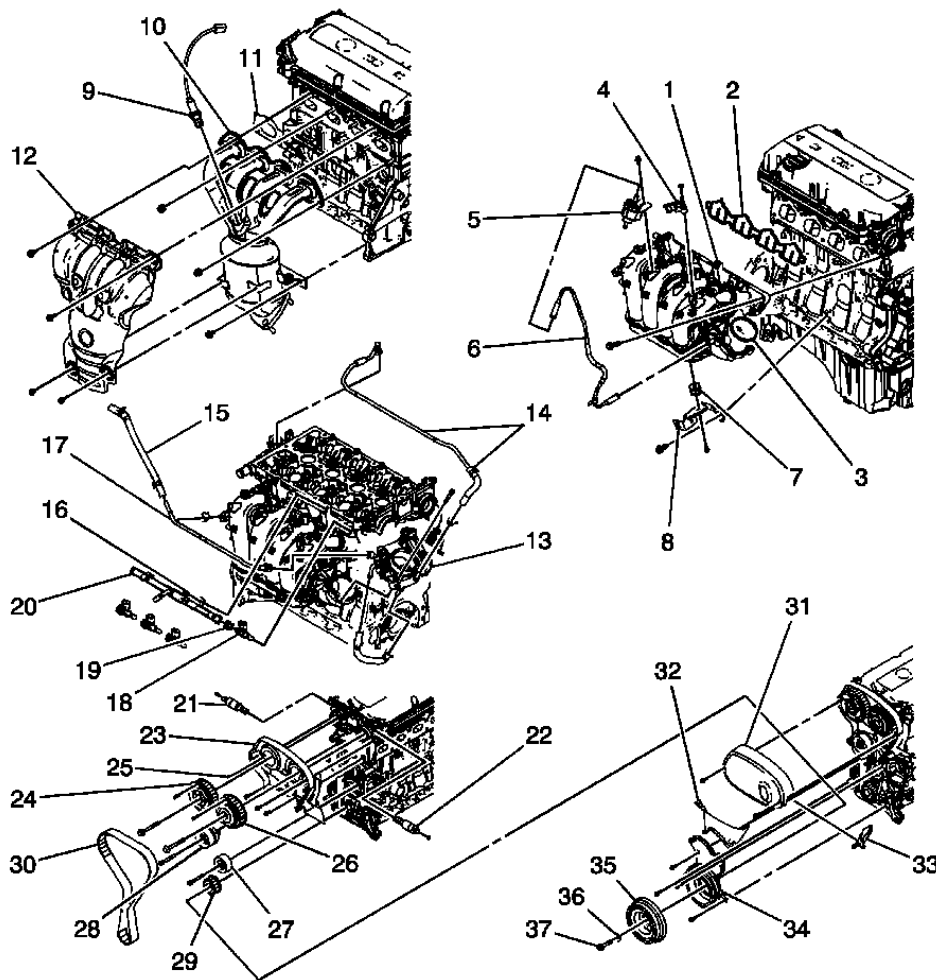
Exploded view OF Intake Manifoldm Exhaust Manifold And Engine Camshaft Timing System
